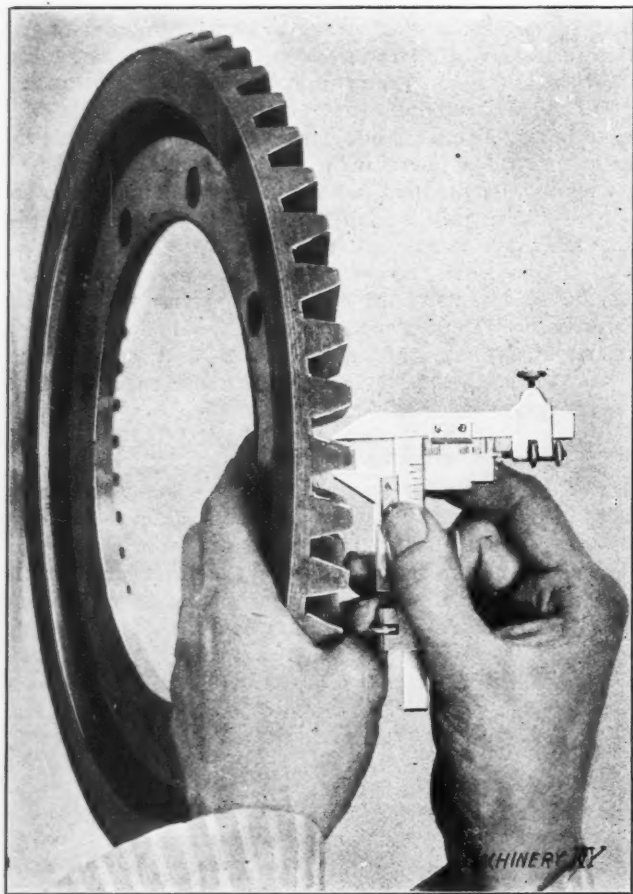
Brown & Sharpe Gear Tooth Caliper in Use measuring Tooth of Bevel Ring Gear
